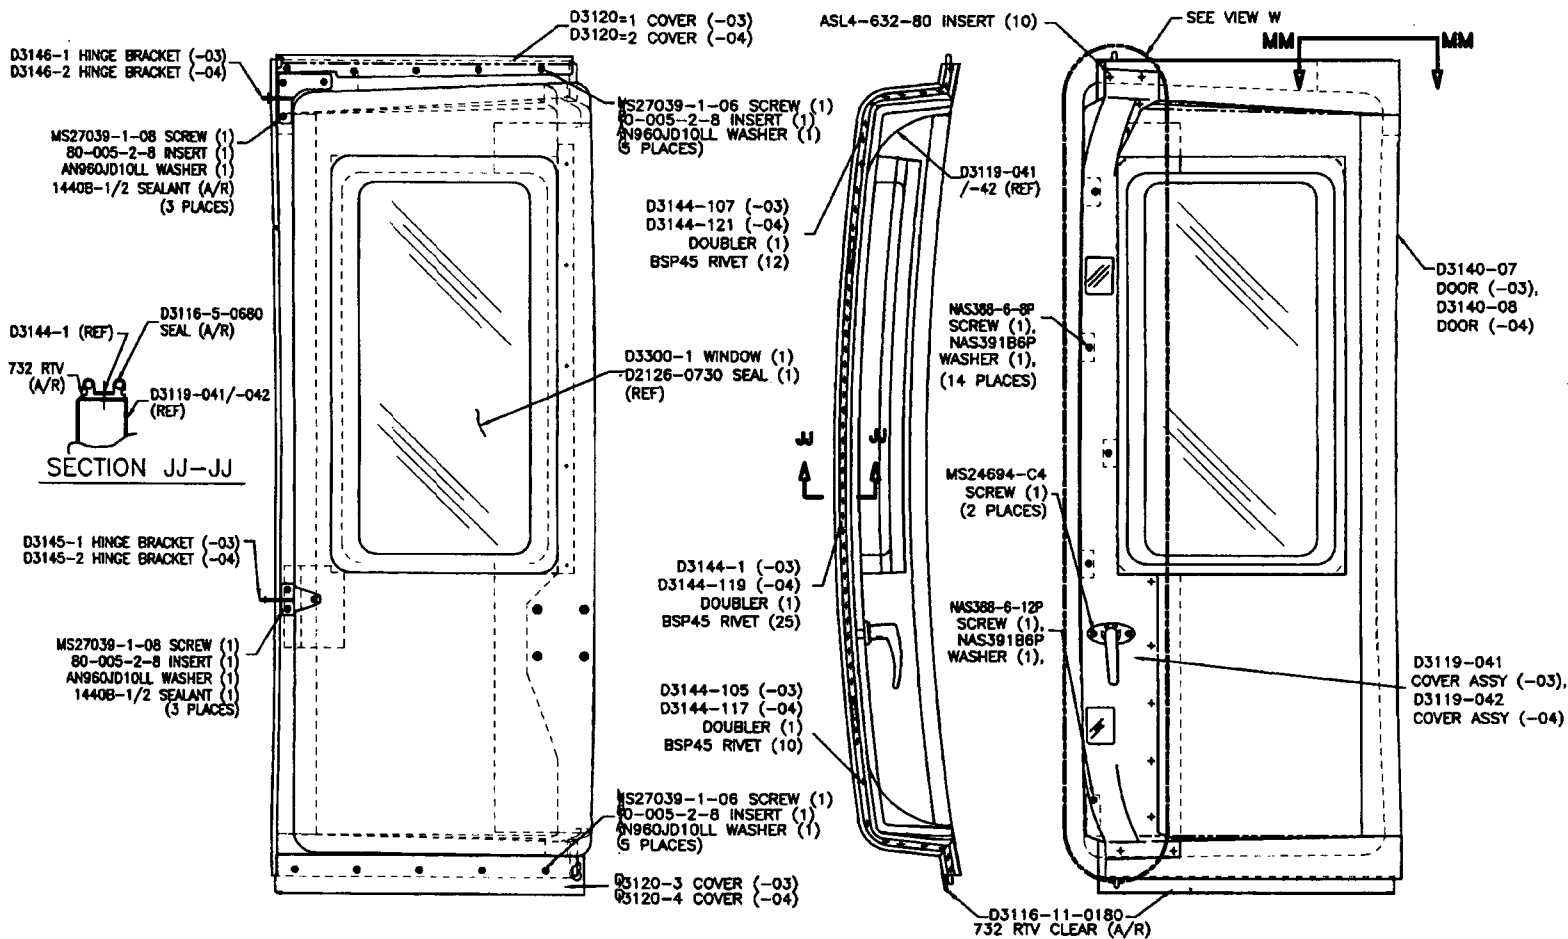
Replacement Parts, D412-694-03/-04 Door Assembly
